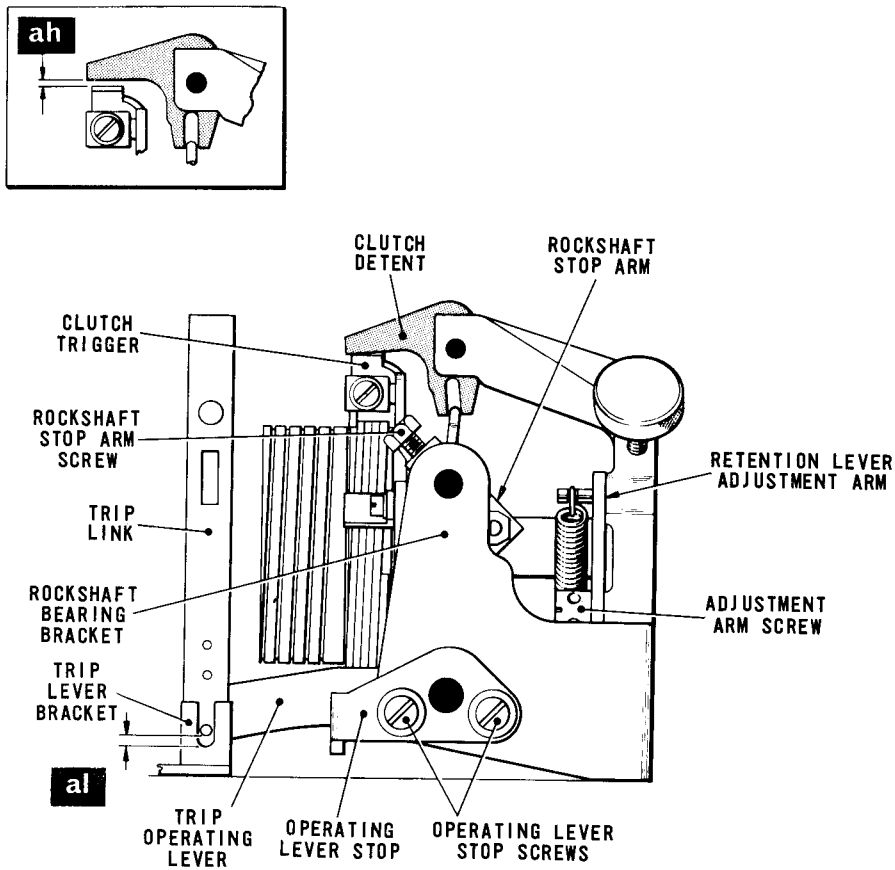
SELECTOR CLUTCH TRIGGER MECHANISM—SIDE VIEW
